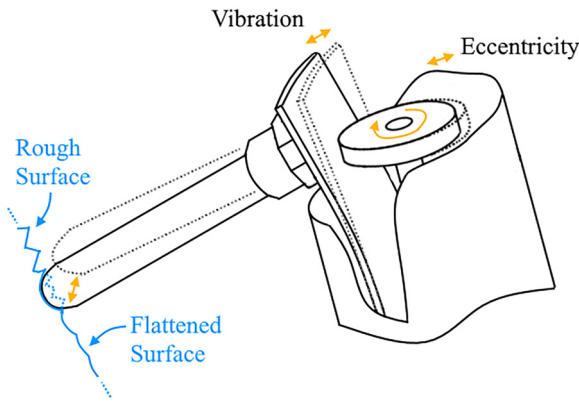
Schematic of hammer peening tool mechanism showing vibration of a rod driven by the rotation of an eccentric weight.
